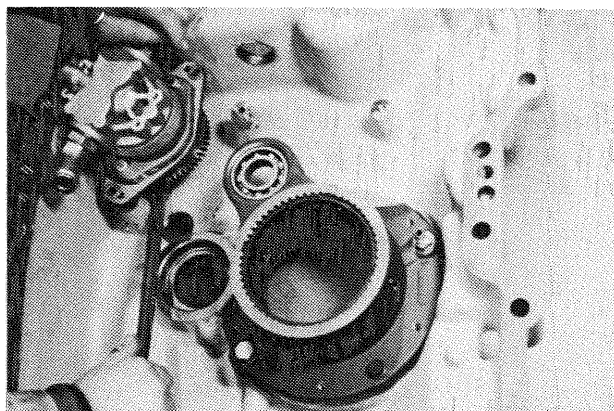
Disassembly of the Front Cover (1 of 3)
